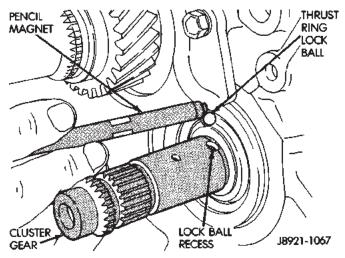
Remove Fifth Gear Thrust Ring Lock Ball
